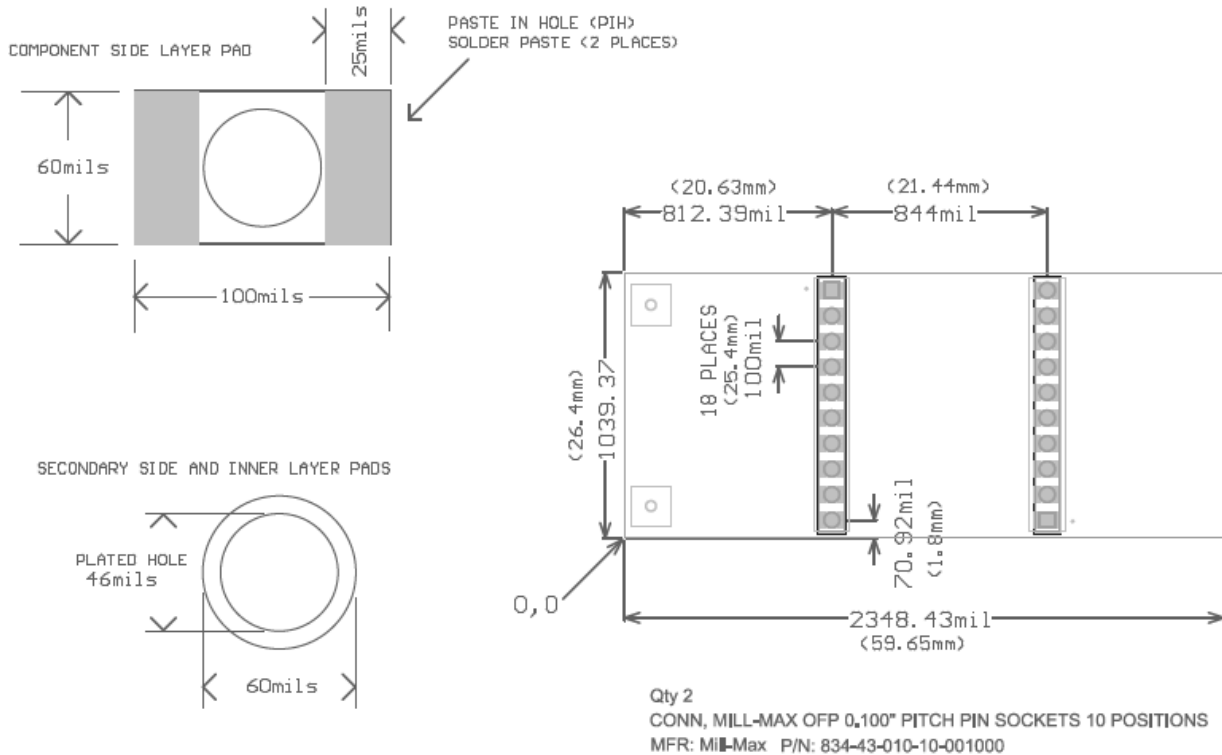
Host PCB Land Pattern – Mill-Max Socket
